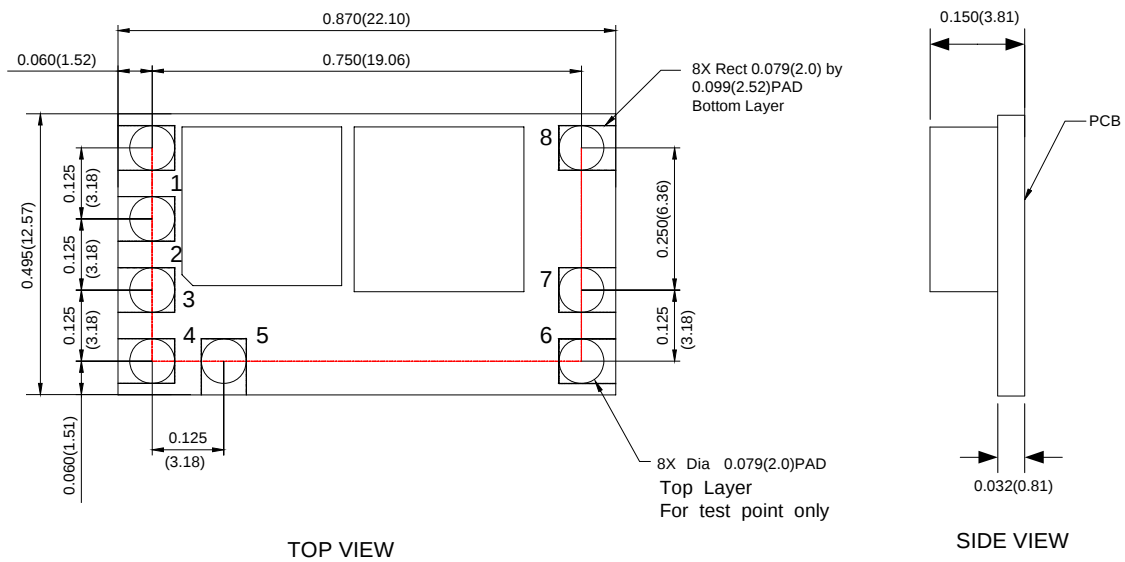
88MG876-T Mechanical Dimensions (SMT Package)
